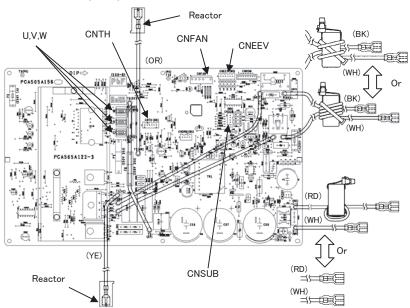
Parts arrangement view (Parts face of PCB (Main))
